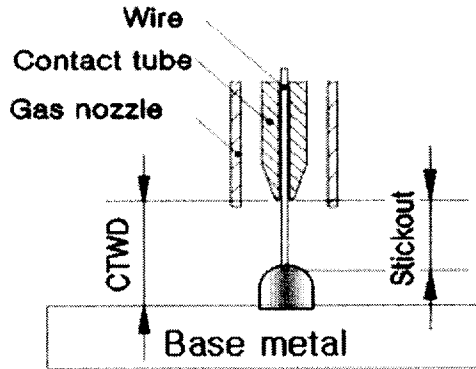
Schematic drawing of CTWD and stickout in MAG welding
